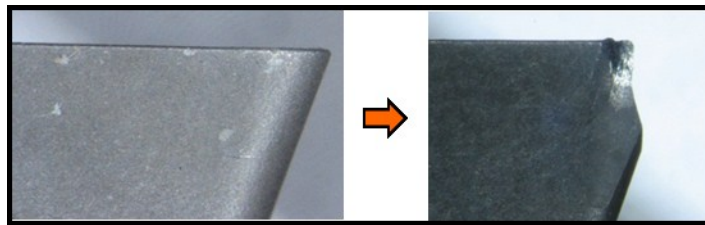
Catastrophically failed uncoated carbide milling insert (flank face). Brittle tool fracture within the tool body due to the tool edge region breaking off is evident.
